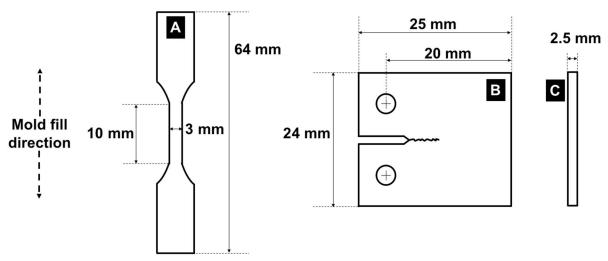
A) ASTM D638 type V dog-bone specimens used for monotonic testing. B) Compact-tension (CT) specimen used for FCP testing. C) Thickness for all specimens. Samples were oriented for load application parallel to the mold fill direction. Drawings are not to scale.
